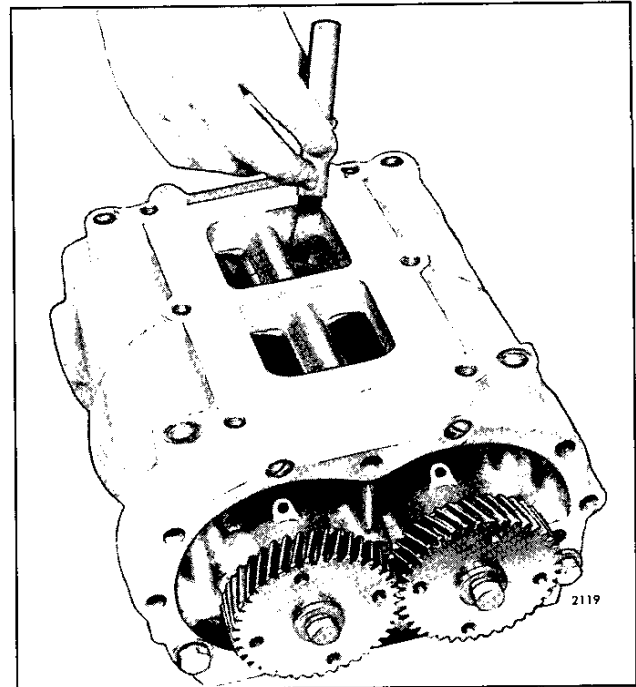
Measuring Rotor Lobe to End Plate Clearance
